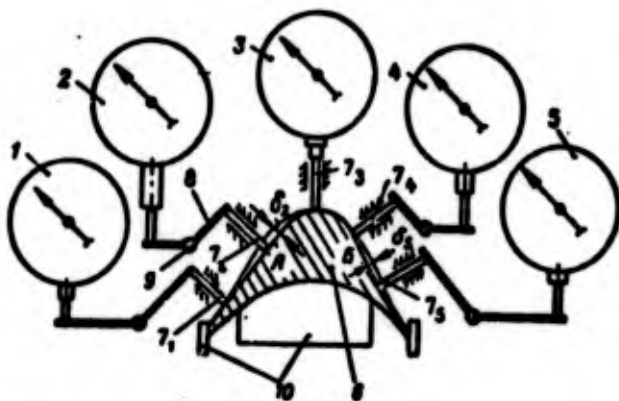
Diagram of the contact method of measurement of geometric dimensions of a blade: 1, 2, 3, 4, 5 - indicators; 6 - measured blades; 7₁, 7₂, 7₃, 7₄, 7₅ - transducers; 8 - two-arm levers; 9 - fixed axis of the levers; 10 - adjusting elements of the instrument.
